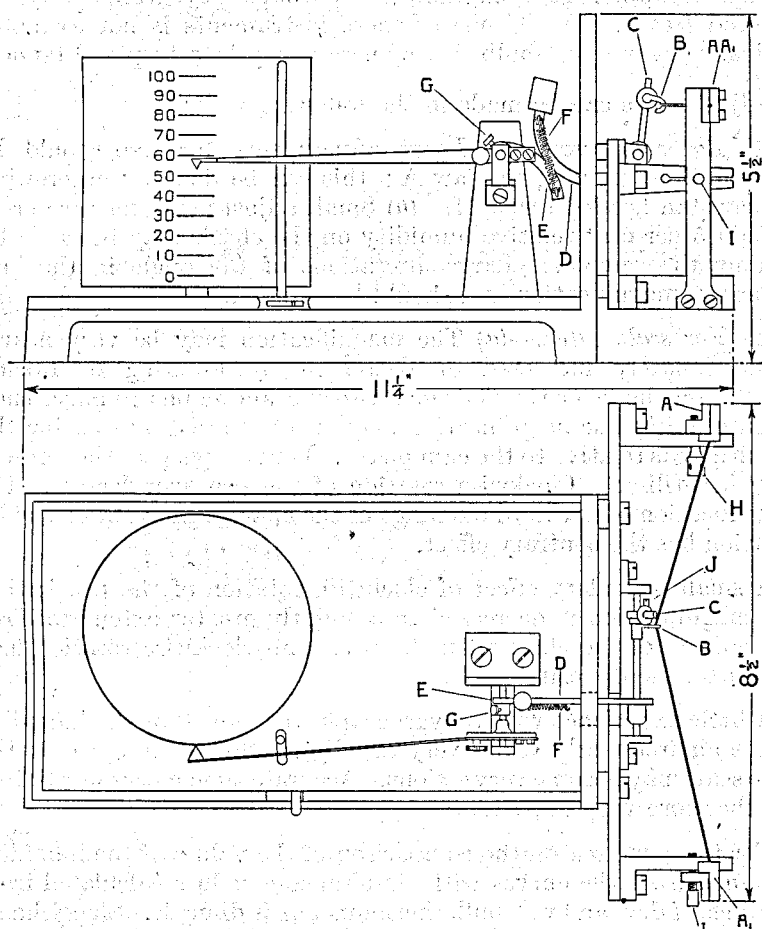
ELEVATION AND PLAN OF HAIR HYGROGRAPH.
